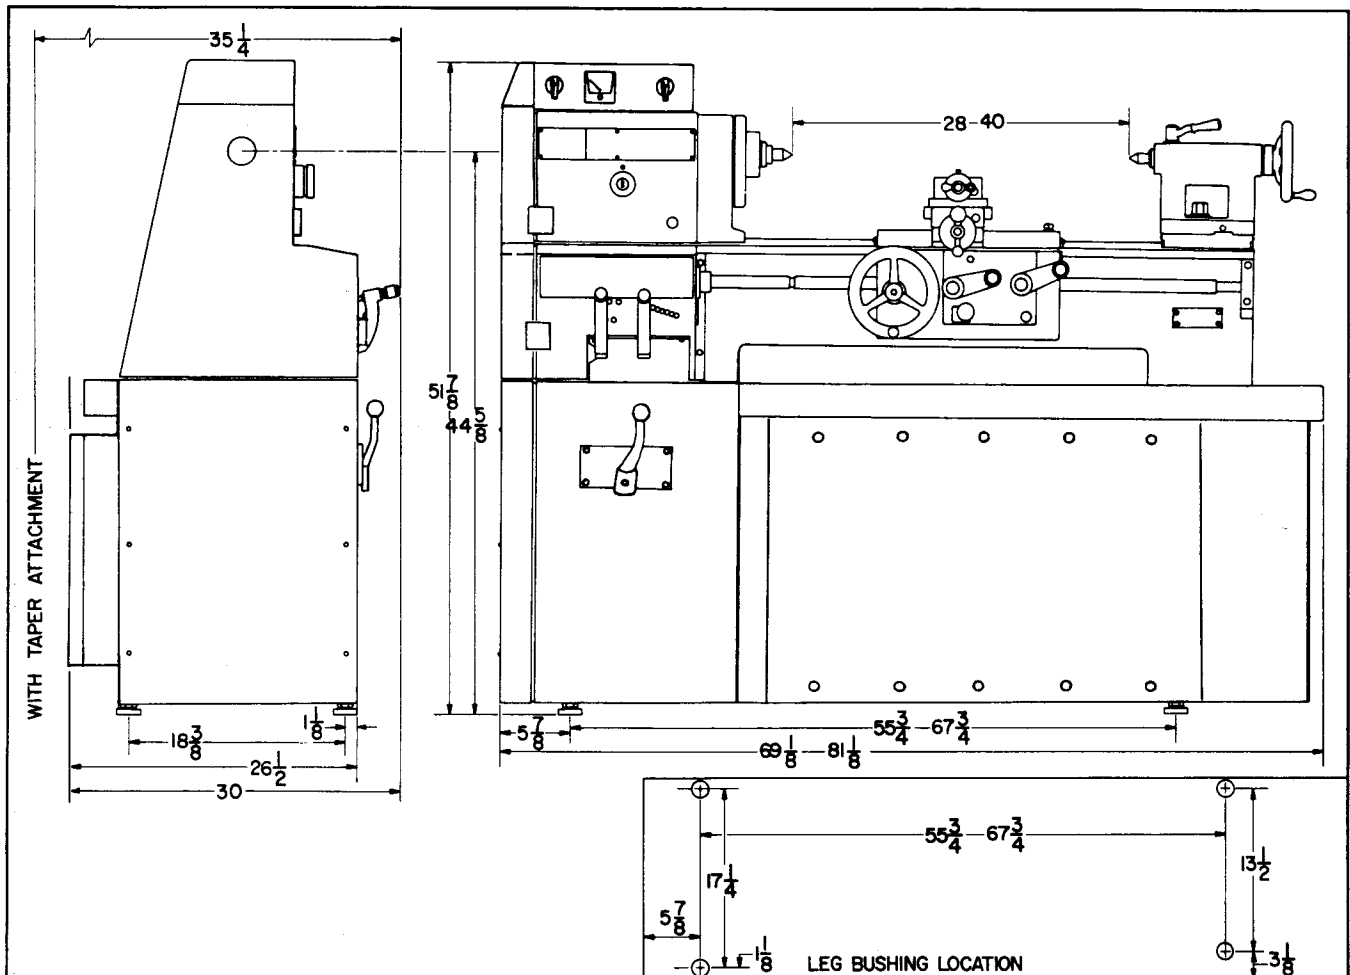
Dimensional Diagram (Approx. Dimensions)
